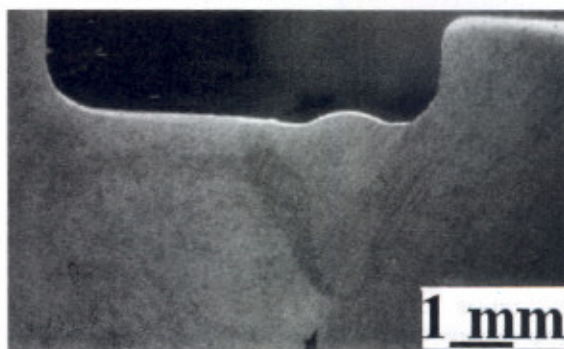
Macroscopic view of Laser weldment cross-section
